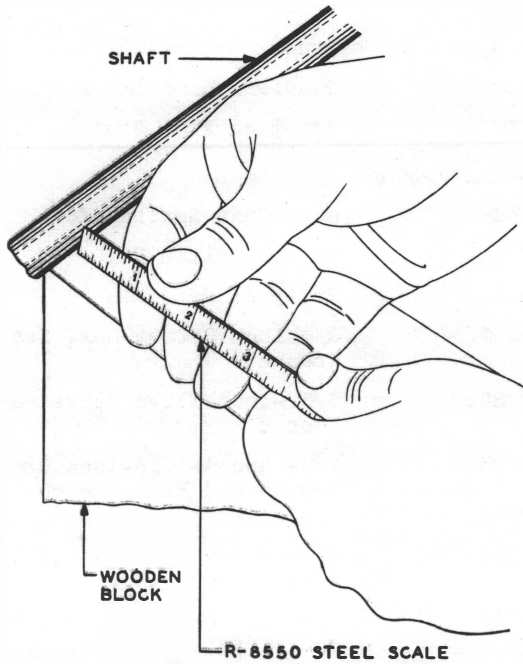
Method of Checking Eccentricity of 2-type and No. 10A Shafts
